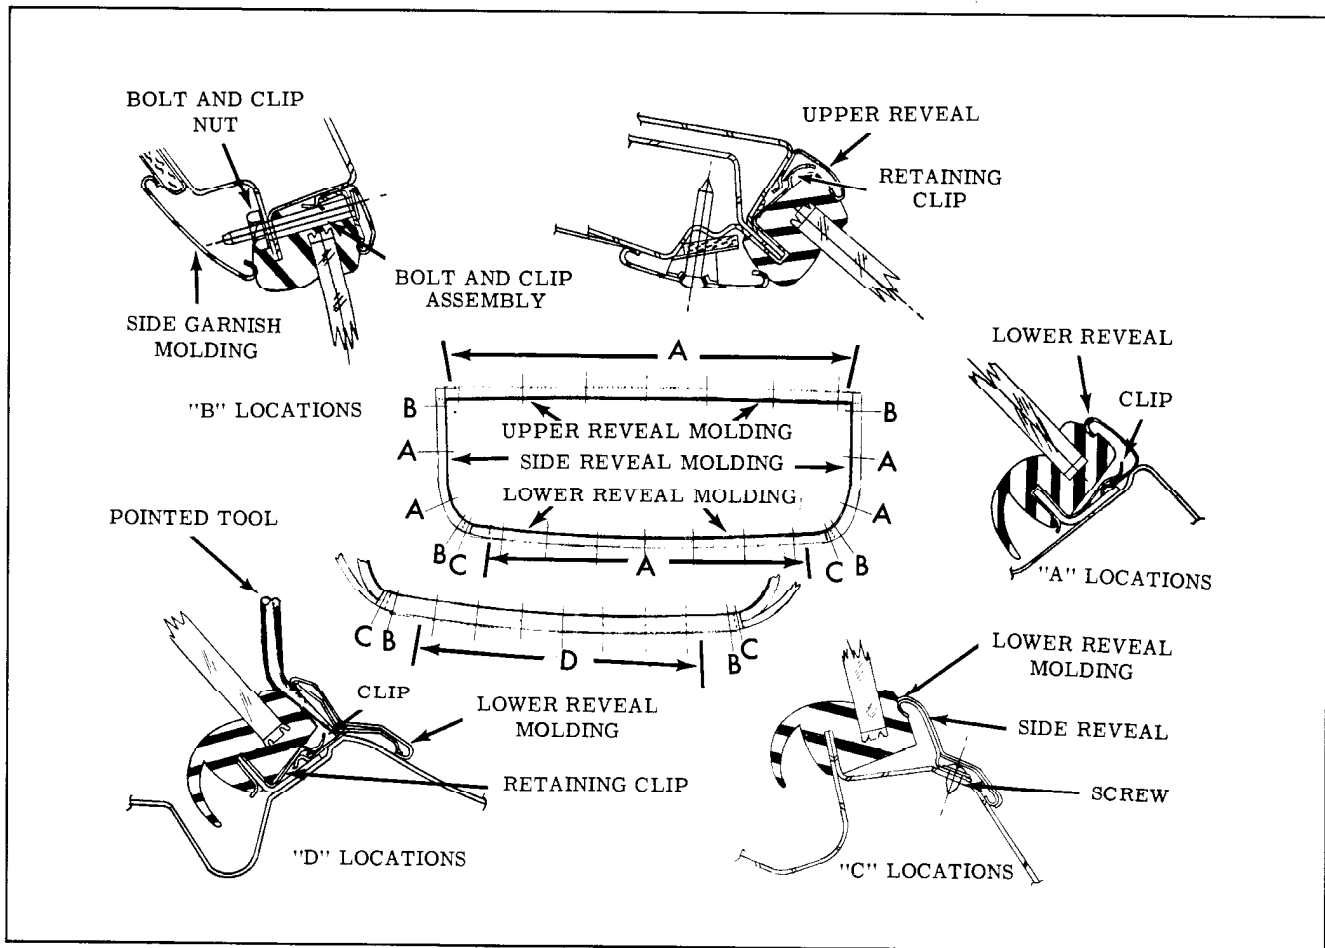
Back Window Reveal Moldings (3239 and 3539 Styles)
